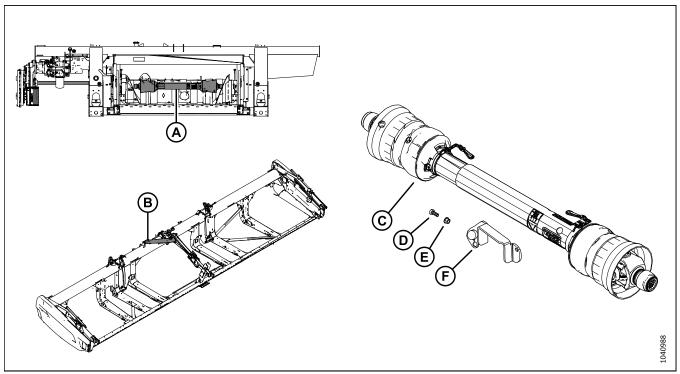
Driveline Shipping Locations and Driveline Parts
